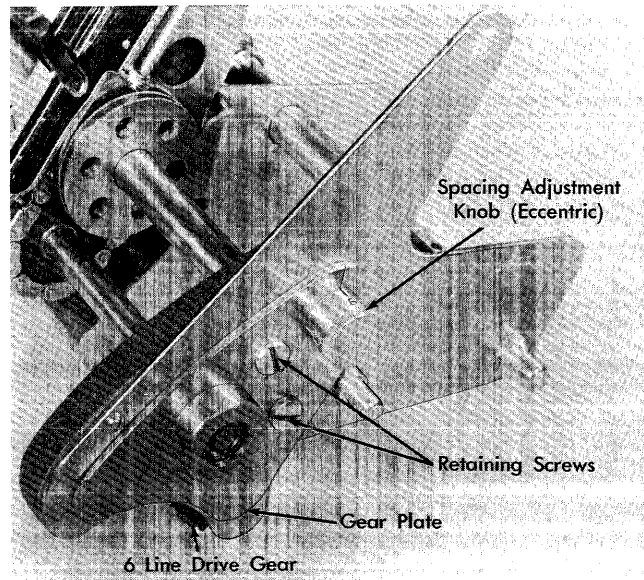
6 OR 8 LINE DRIVE (MODEL F-3)
